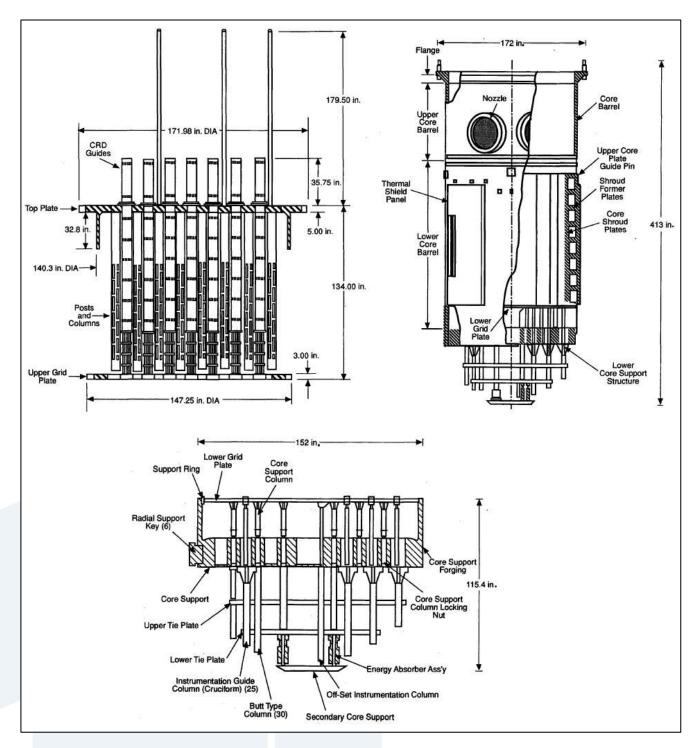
Upper Core Assembly (Upper left), Lower Core Assembly (Upper right), Lower Core Support Structure (Bottom). Reference Dimensions [Ref. 48]
